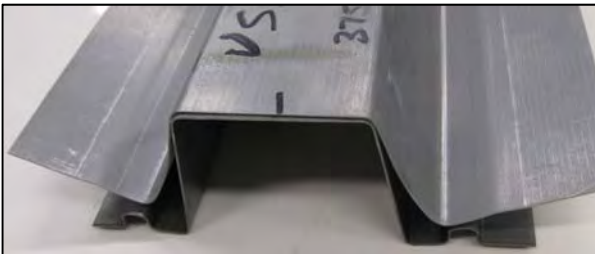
C-28A: Two DP 450/750 parts from the same coil formed in the same die, the only difference being that the bottom part had stake beads that engaged near the bottom of the press stroke to induce an additional 2% strain in the sidewall to control springback.
